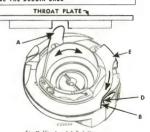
View from Left End. Showing Replacement of Bobbin Case
